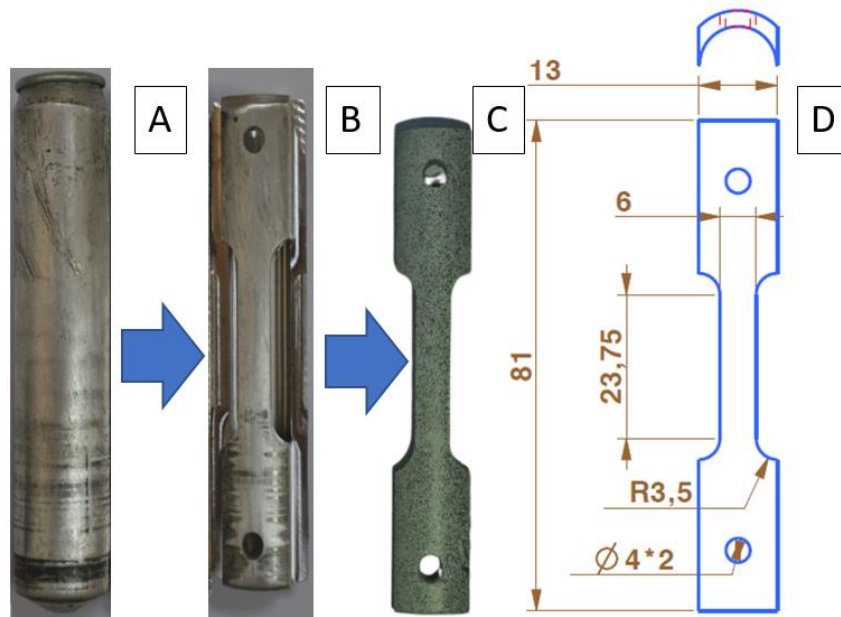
A) FSBE processed AZ31-b tube B-C) tensile sample test preparation with speckle patterns surface. D) tensile test sample dimensions.
